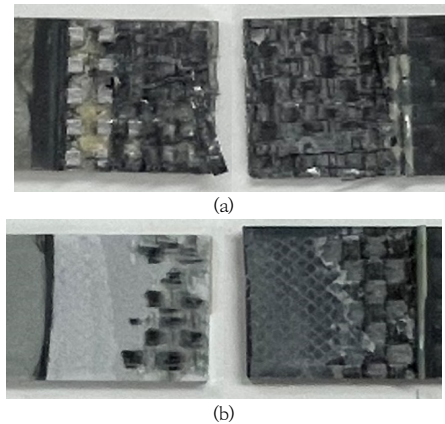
Fractured surface of specimen with (a) interlocking structure and (b) plane surface
